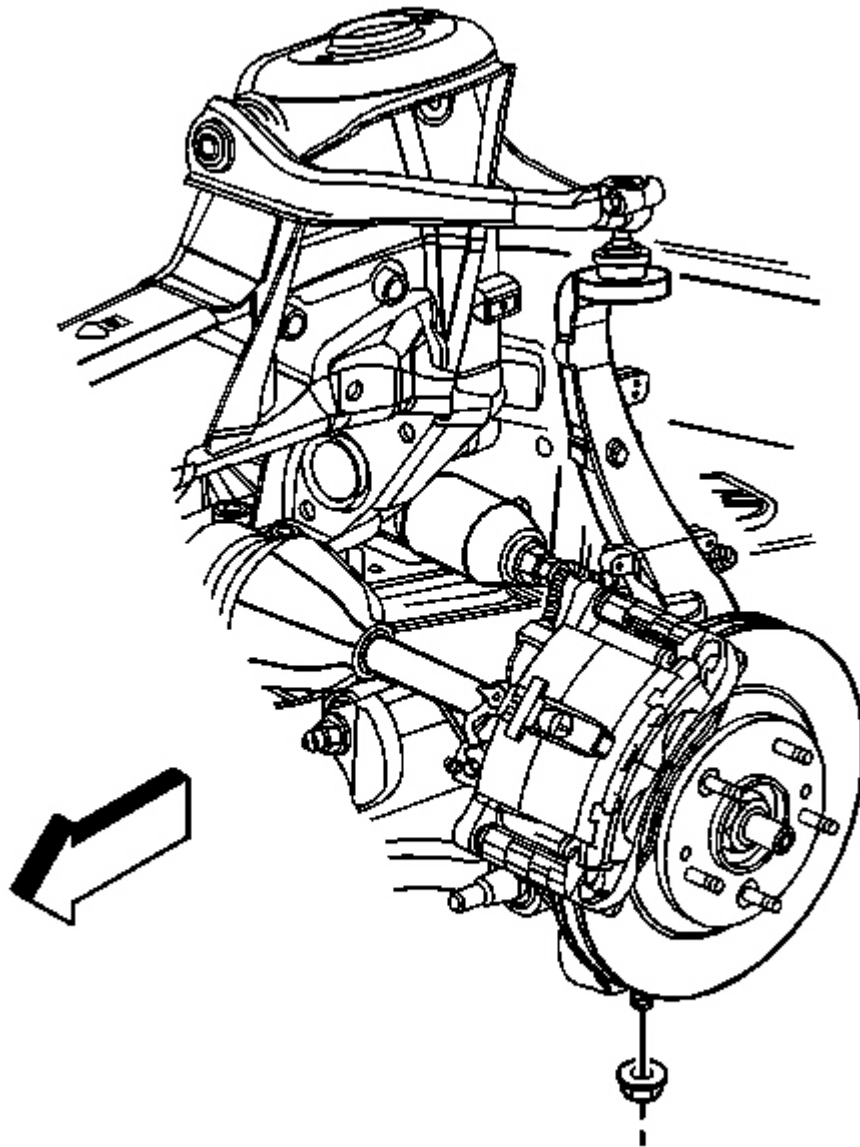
View Of Brake Hose Bracket & Retaining Bolts
